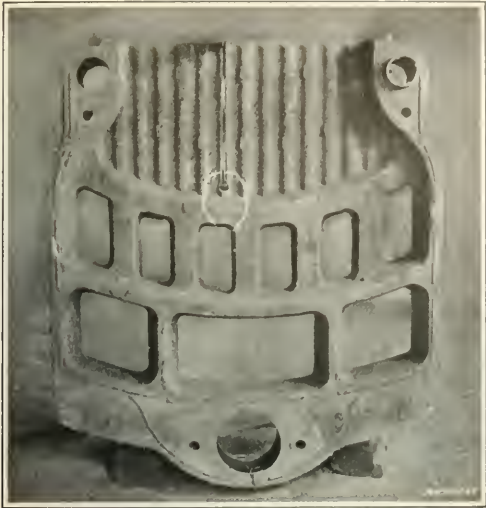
Crack in Section of a Cast-iron Heating Boiler
